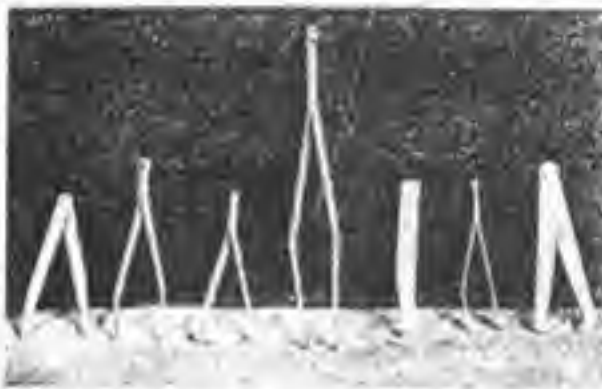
Tools of various shapes, calipers and scribers made from old hack saw blades.
